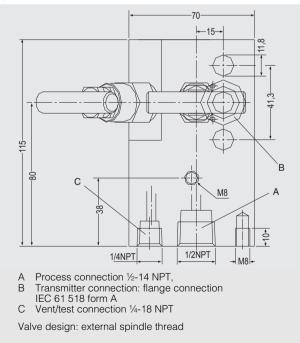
/86 Two-spindle valve manifold DN 5, dimensions
